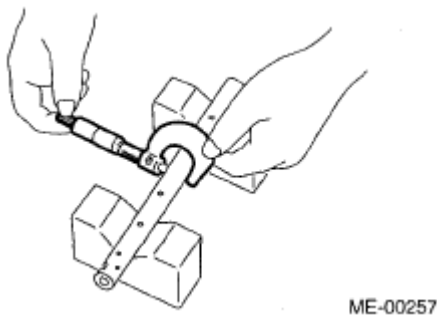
Measuring Outer Diameter Of Valve Rocker Shaft
